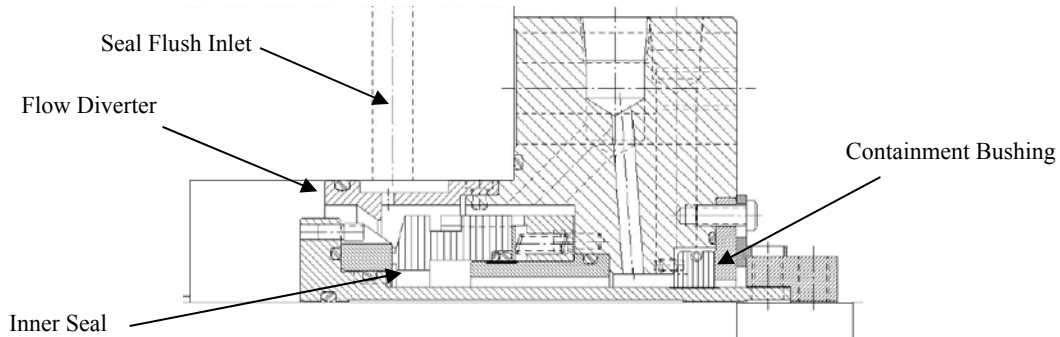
1CW-FL Type A with API Piping Plan 11 / 66B
